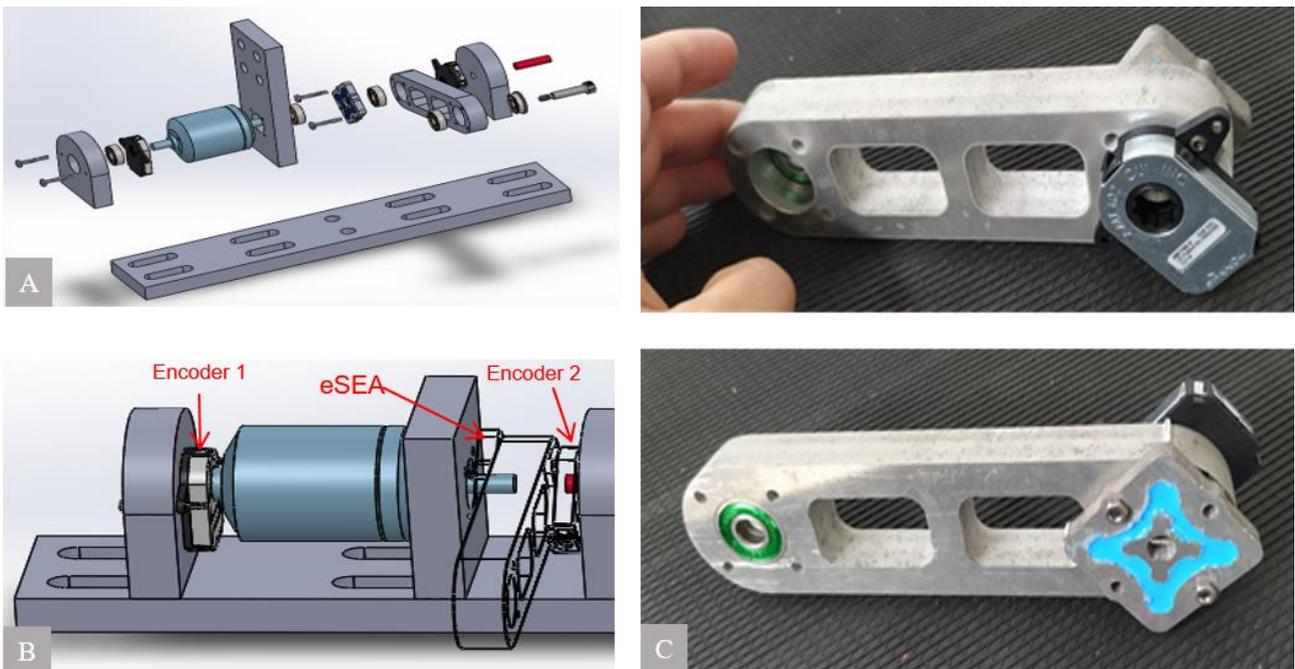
Assembly of the system with eSEA. A) Exploded view. B) Position of eSEA, encoders and motor. C) Assembly of eSEA, encoder and link.
